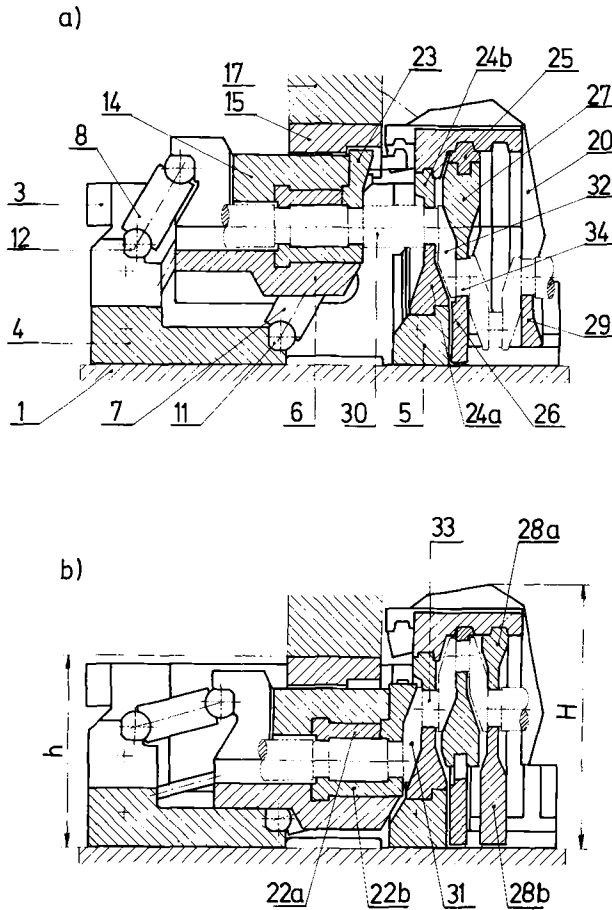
Sectional view of the device shown in Fig. 4: (a) Before forming the second crank web of the same crank throw; (b) After forming the first crank web of the next crank throw.
